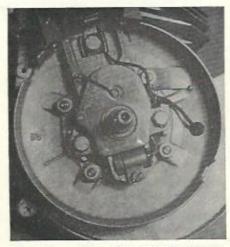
View of Model 275 magneto showing timing mark. Punch mark near center of slot for lower left retaining cap screw should be aligned with raised line on backing plate.
